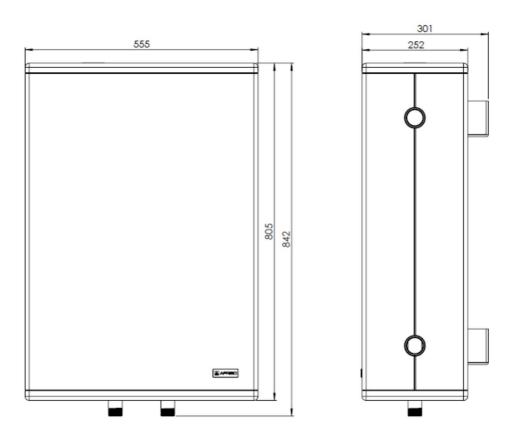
Dimension of buffer tank ABT 50 with insulation.
